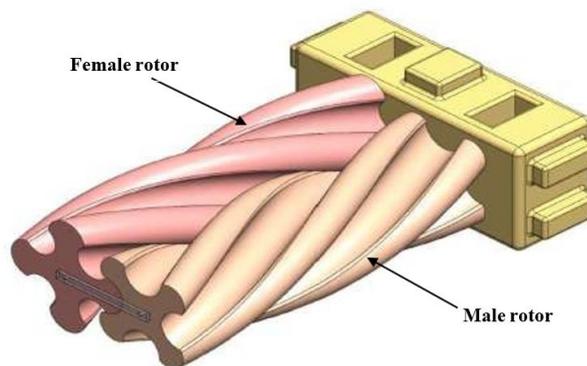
a) Schematic view of rotors contacts in the screw compressor model
